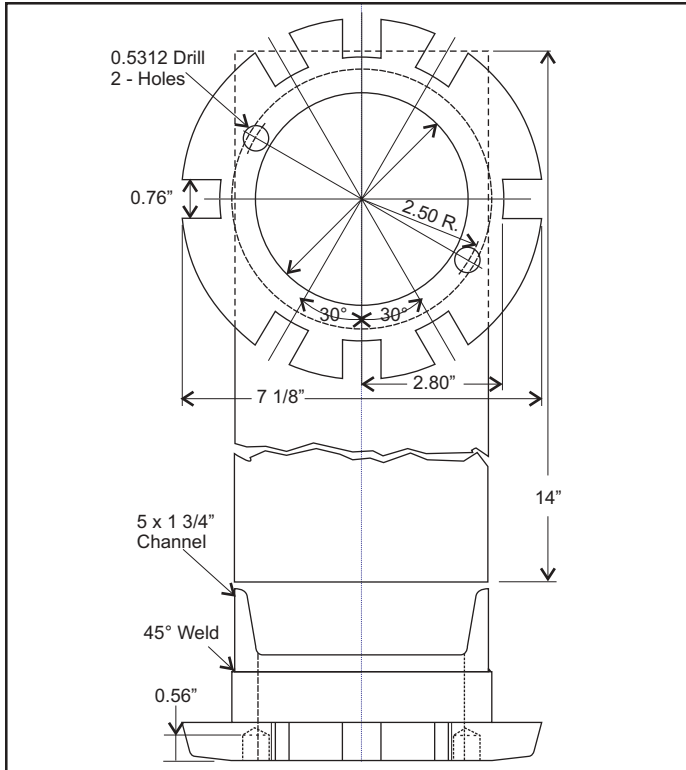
Piston Assembly Jig for Removing and Installing Lock Plug 8 1/2, 9 and 10
